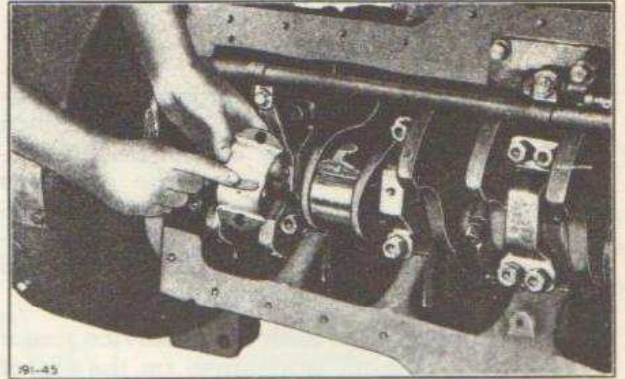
Checking Connecting Rod Bearing Clearance with Shim Stock
